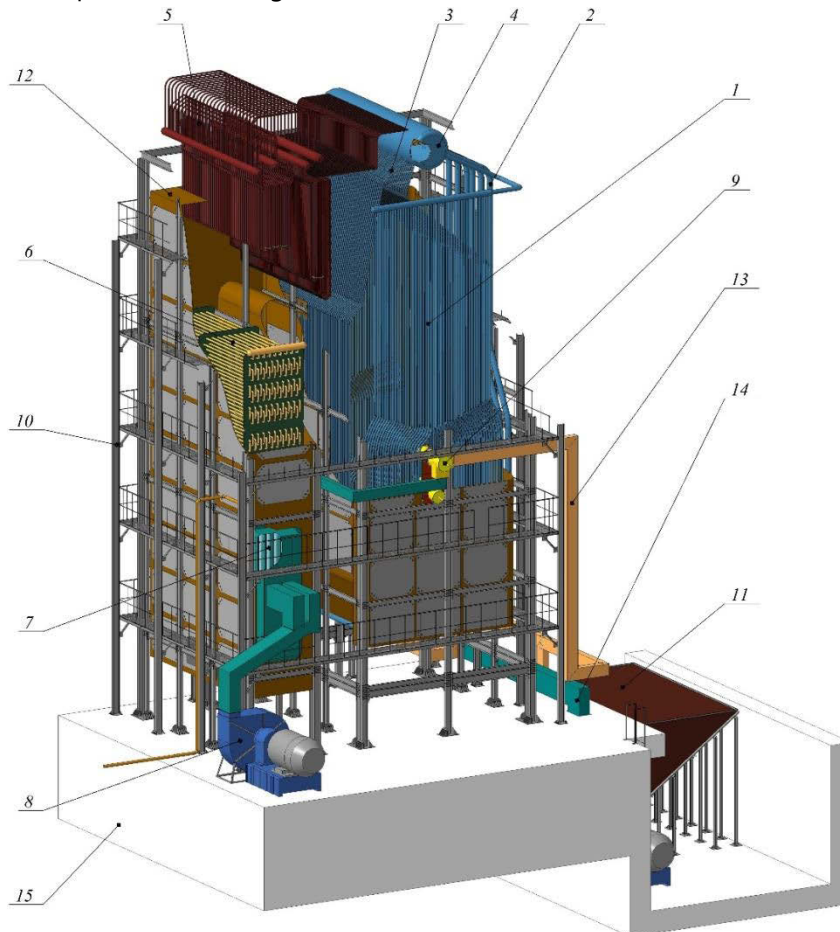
Sectional drawing 3D model of the steam generator E-75-42-440 CT:
